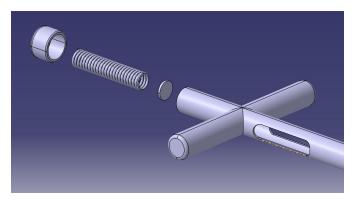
Outer Tube Exploded View. This detailed separation of the top cap from the "T" shaped bar reveals the interior spring and spring plate of the DRTFLOSS outer tube.
